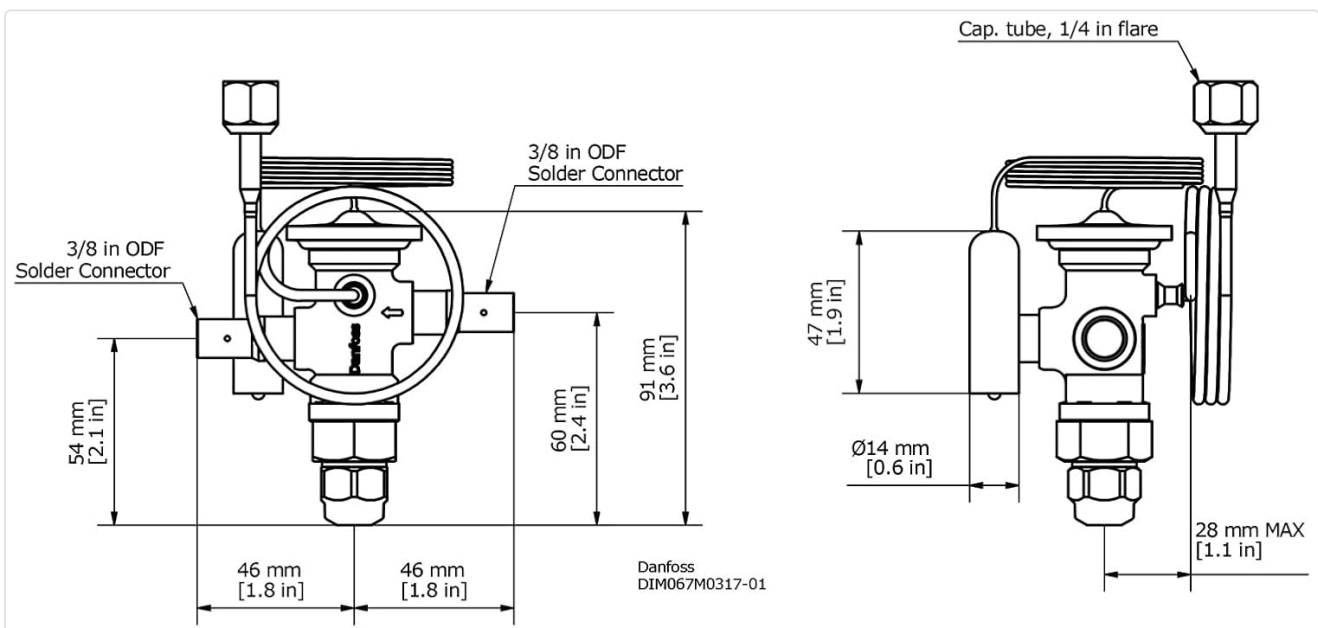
Detailed technical drawing of the Danfoss TR6 TXV, showing various dimensions and connection points.
